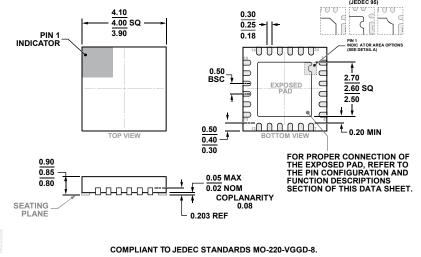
24-Lead Lead Frame Chip Scale Package [LFCSP] 4 mm × 4 mm Body and 0.85 mm Package Height (CP-24-22) Dimensions shown in millimeters
